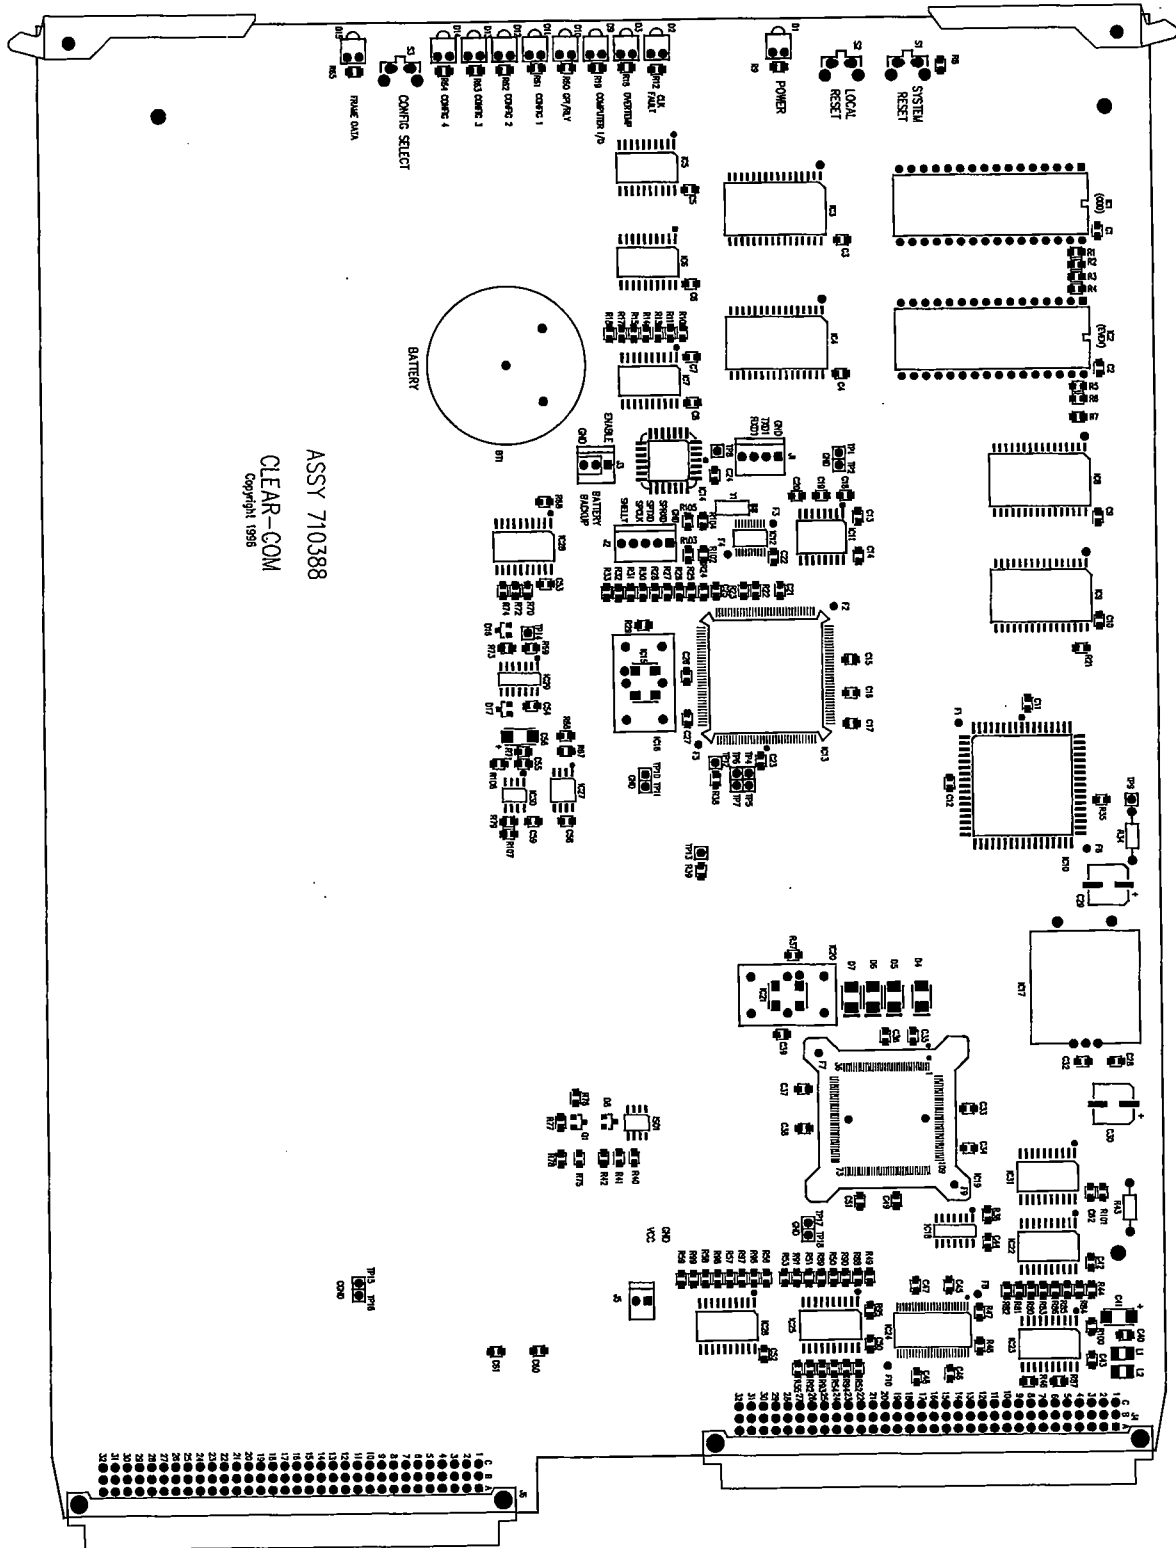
Assembly Drawing - CONFIG-1 PCB Rev. C
